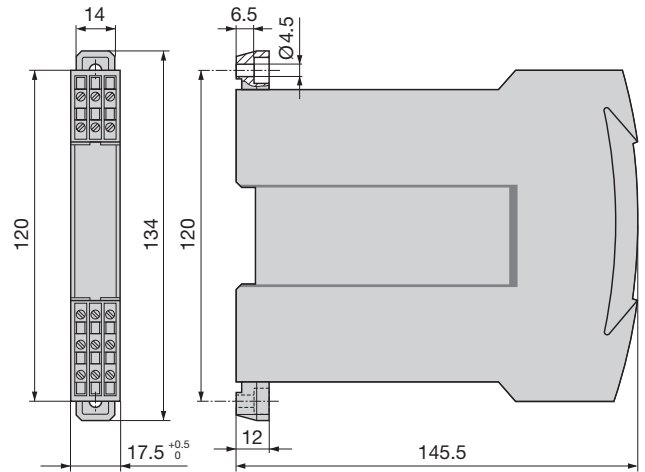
SINEAX C 402-1 in housing S17, screw hole mounting brackets pulled-out.
